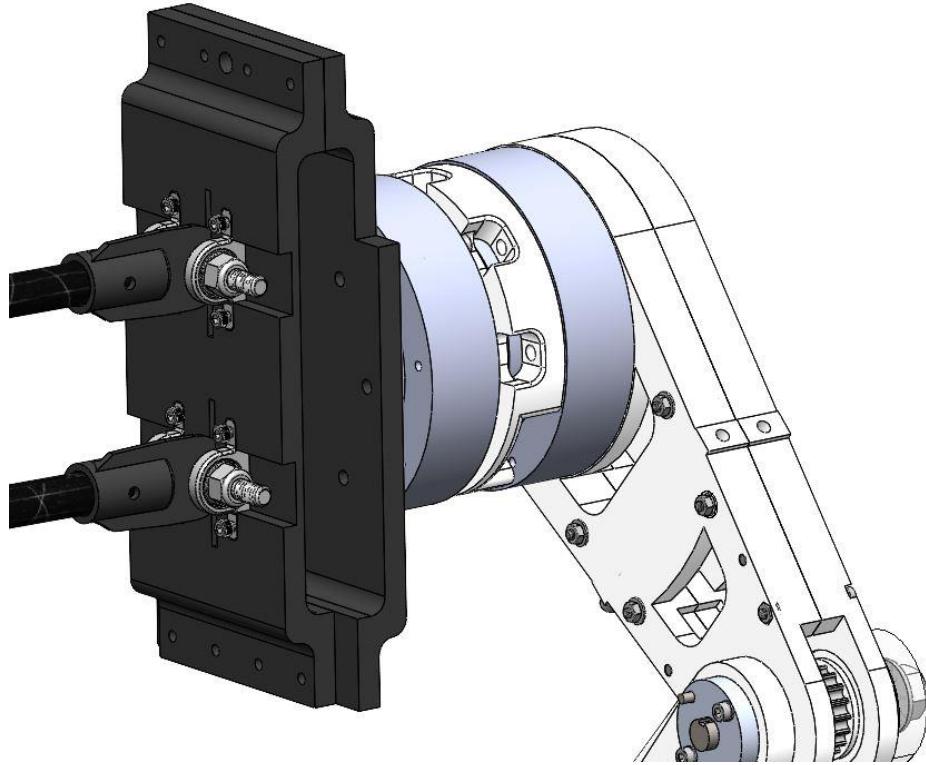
Leg mount, shown connected to booms on left and robot leg on the right
